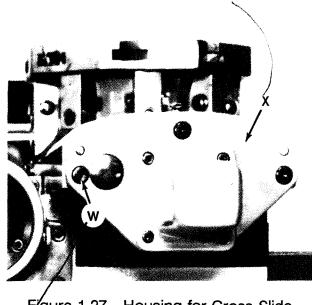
Housing for Cross Slide Feed Screw Nut
